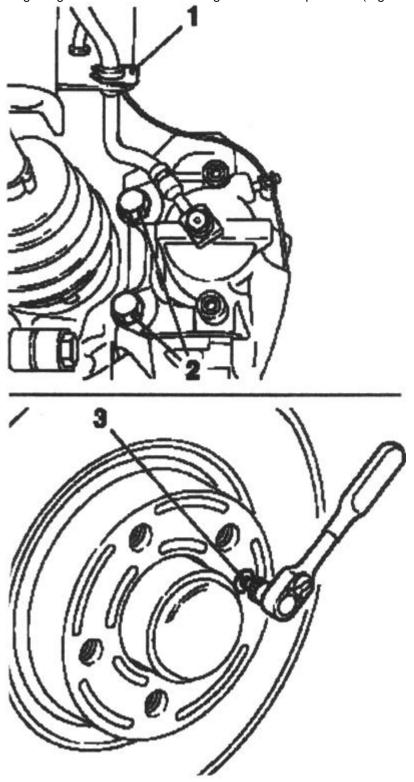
Withdrawal inhibitory drive a car Opel Astra:
